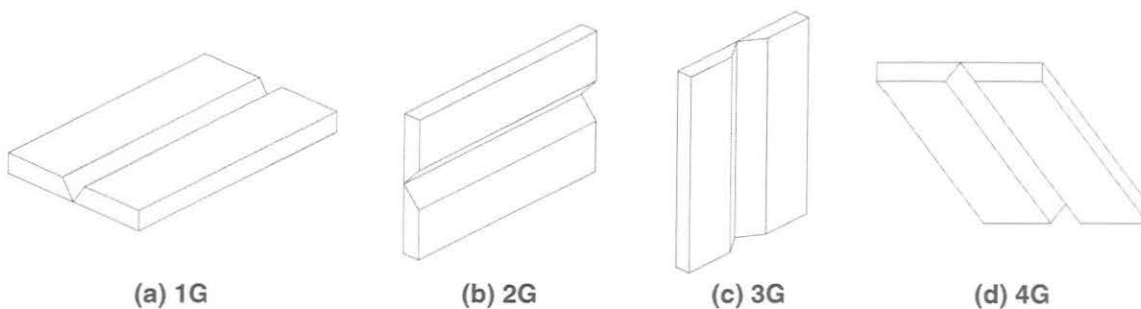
QW-461.3 Groove welds in plate—test positions
